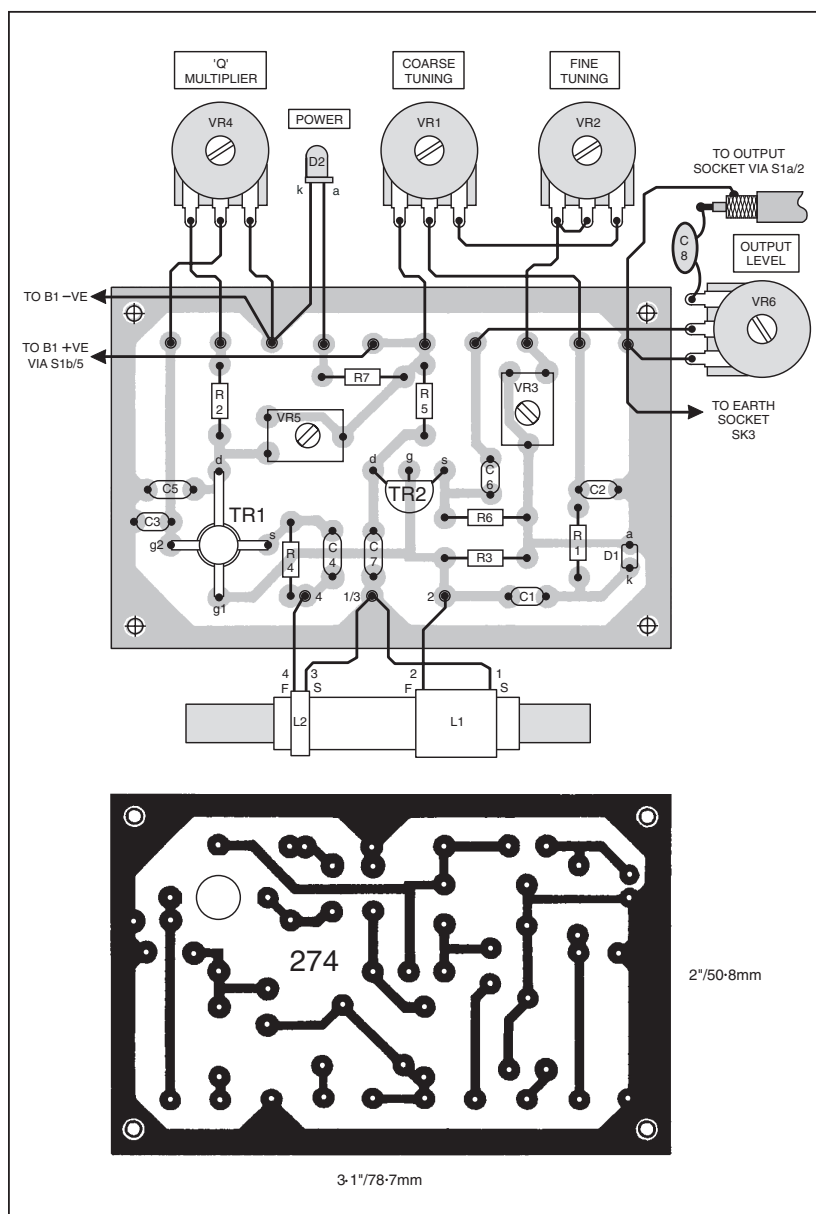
Printed circuit board topside component layout, off-board wiring and full-size copper foil underside master. Note capacitor C8 is mounted directly on one outer tag of VR6 and soldered to the centre core of the output screened lead.
